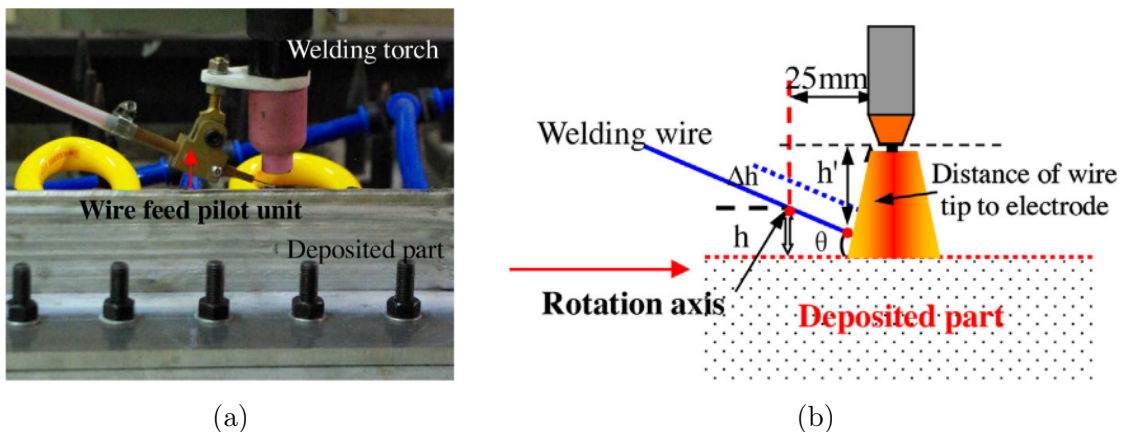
Wire feeding configuration (e.g. PAW) (a) and parameters (b) for front feeding assembly [37].
